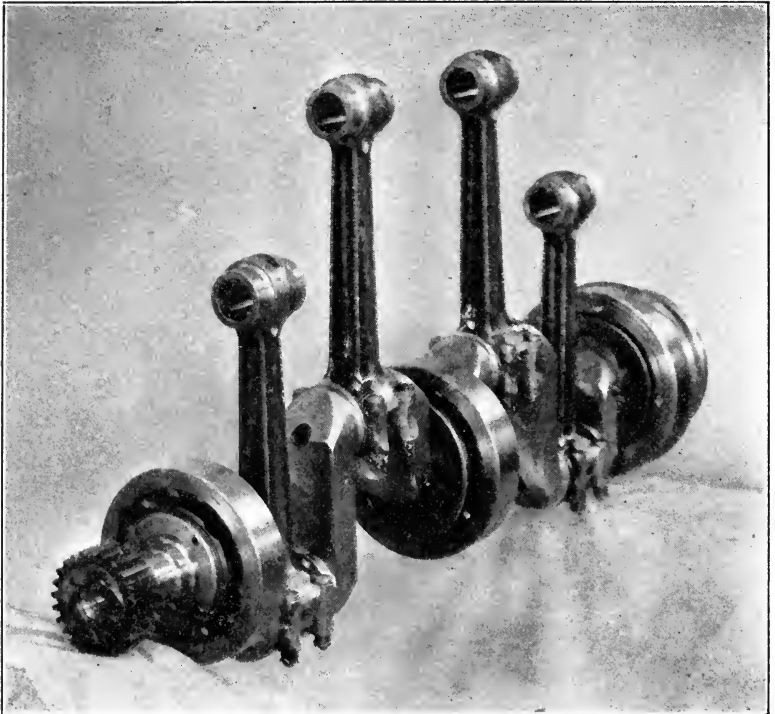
Four-Throw, Three-Bearing Lozier Crank Shaft and Connecting Rod Assembly Mounted on Three Large Annular Ball Bearings. Note Connecting Rod Design and the Use of Plain Bearings at Both Wrist-pin and Crank-pin Ends.
